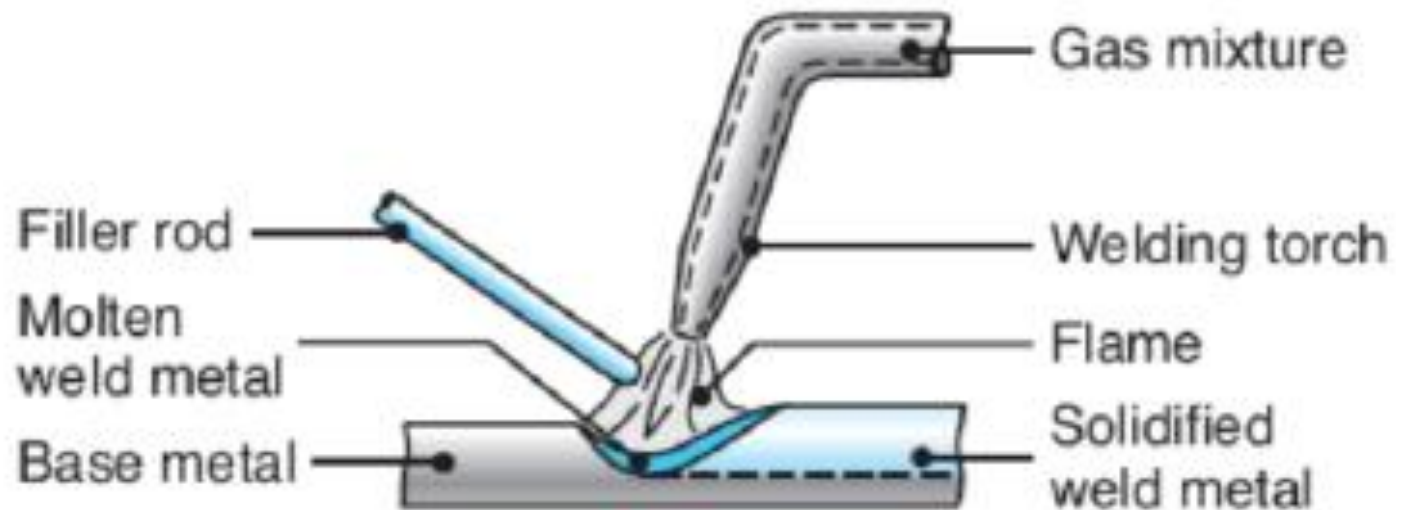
Apparatus in oxyfuel gas welding
